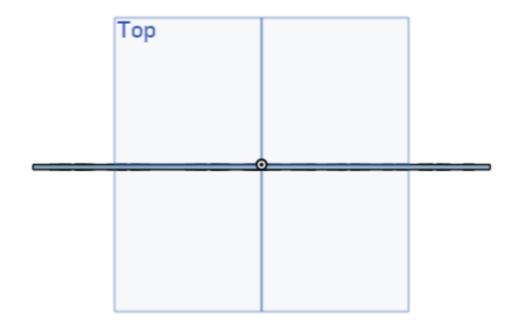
Top Onshape Drawing of Stencil 1 "Go Gators!" design
